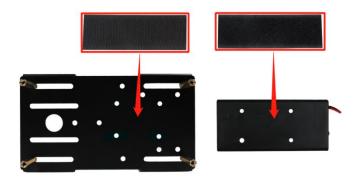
Under metal floor copper column installation effect diagram
